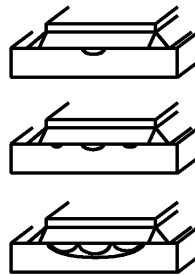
Stages of crack growth for cracks at transverse weld toes
